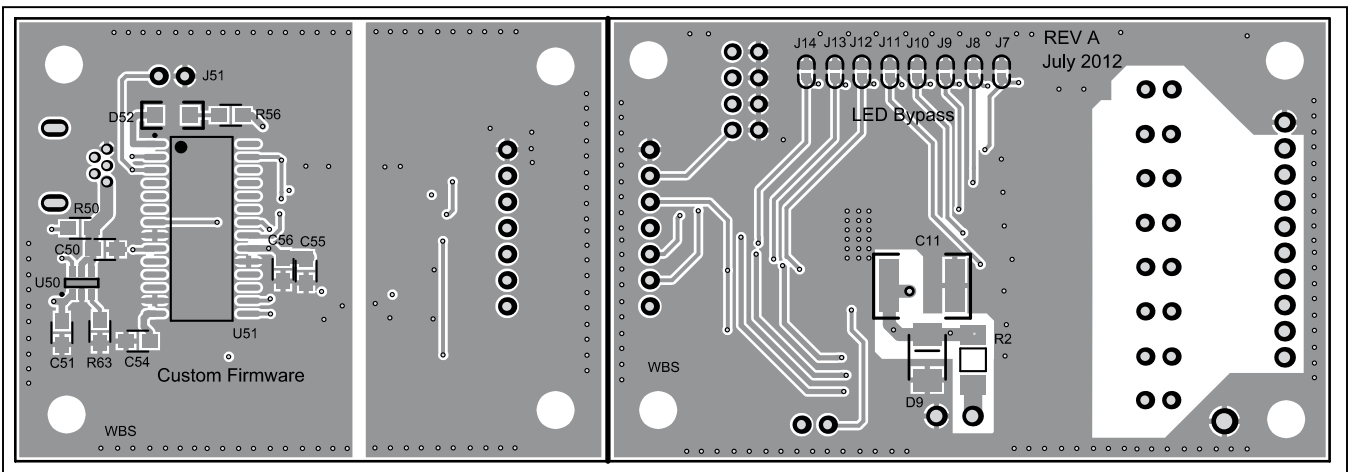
MAX31910/11 EV Kit PCB Layout—Bottom
